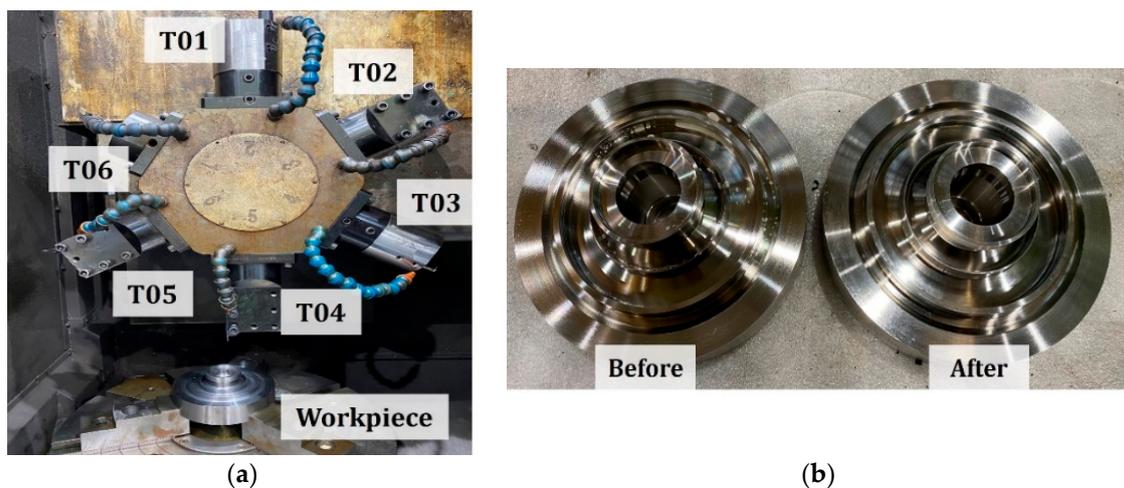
Experimental setup and the photograph of manufactured turbine disks. (a) Six cutting tool inserts and workpiece; (b) final products before and after feed optimization.
